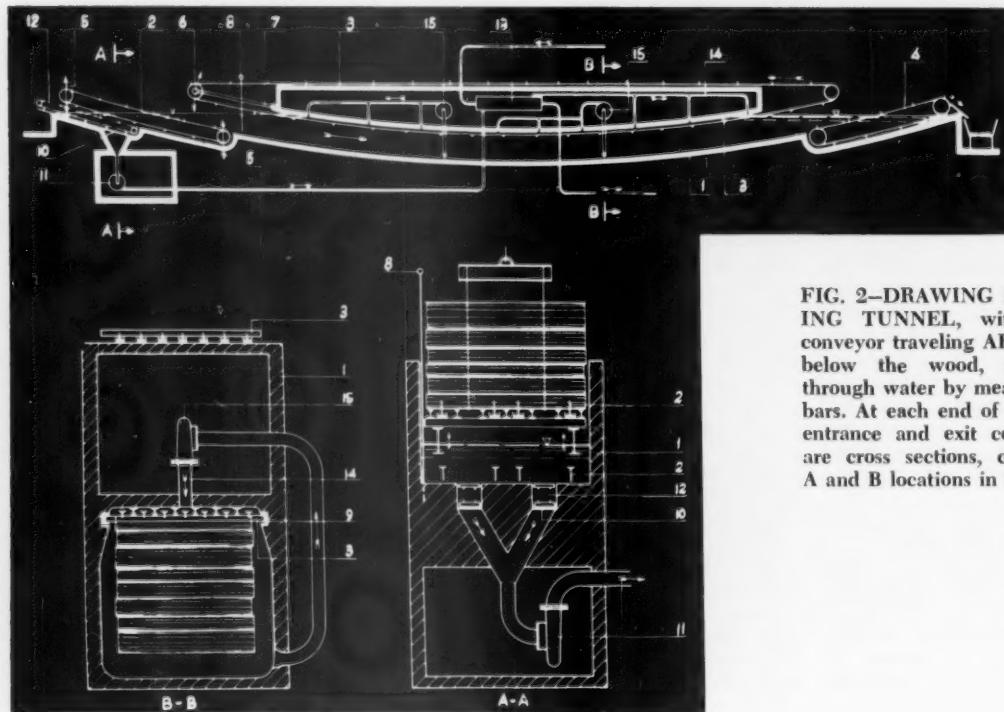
DRAWING SHOWS SOAKING TUNNEL, with upside-down conveyor traveling ABOVE instead of below the wood, dragging wood through water by means of steel cross bars. At each end of top drawing are entrance and exit conveyors. Below are cross sections, corresponding to A and B locations in top drawing.
